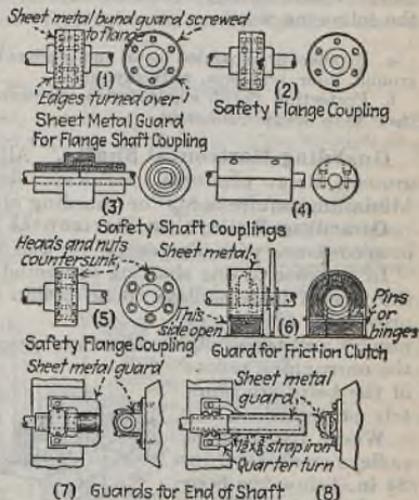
Guarding clutches, couplings, and shaft ends.
